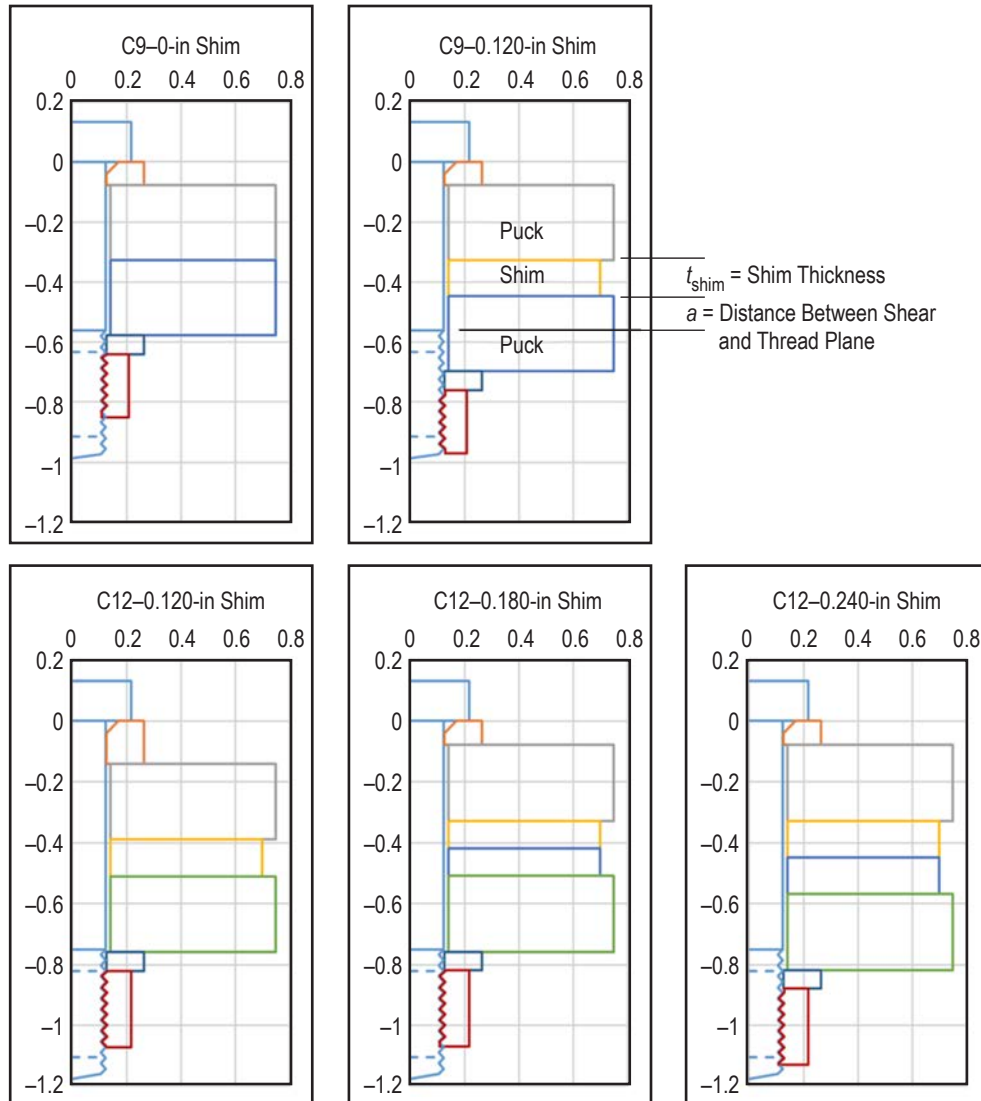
Sketch of select test conditions showing distance between shear plane and threads.
